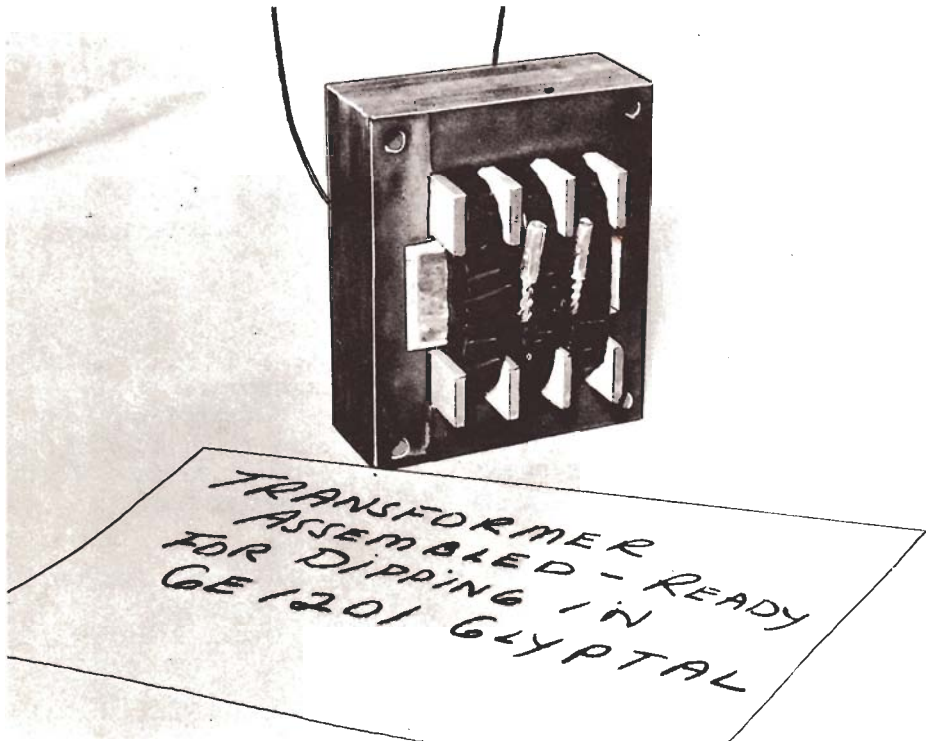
ONE SECTION OF THE TRANSFORMER ASSEMBLED, READY FOR FINAL DIP IN INSULATING PAINT OR VARNISH.
